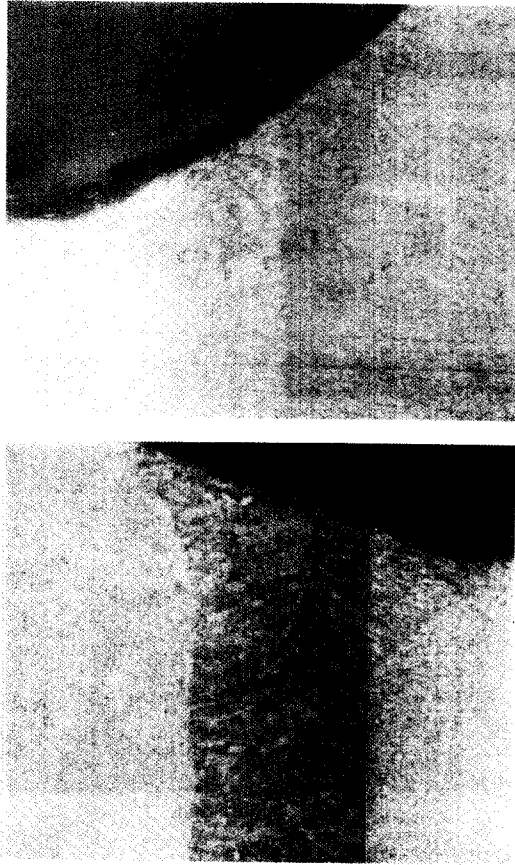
Bead cross-sections of welded specimens with different thicknesses at laser beam power 4kW, Ar gas flow rate 30 l/min :
